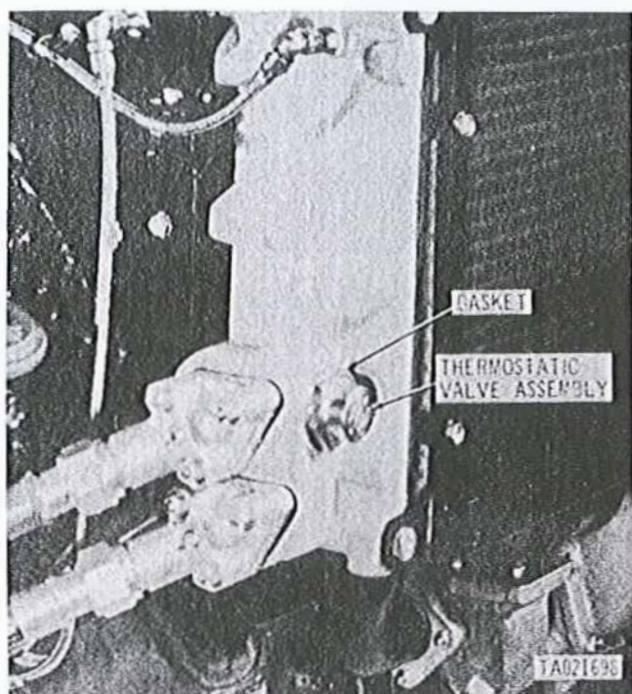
Removing or installing engine oil cooler thermostatic valve assembly.
